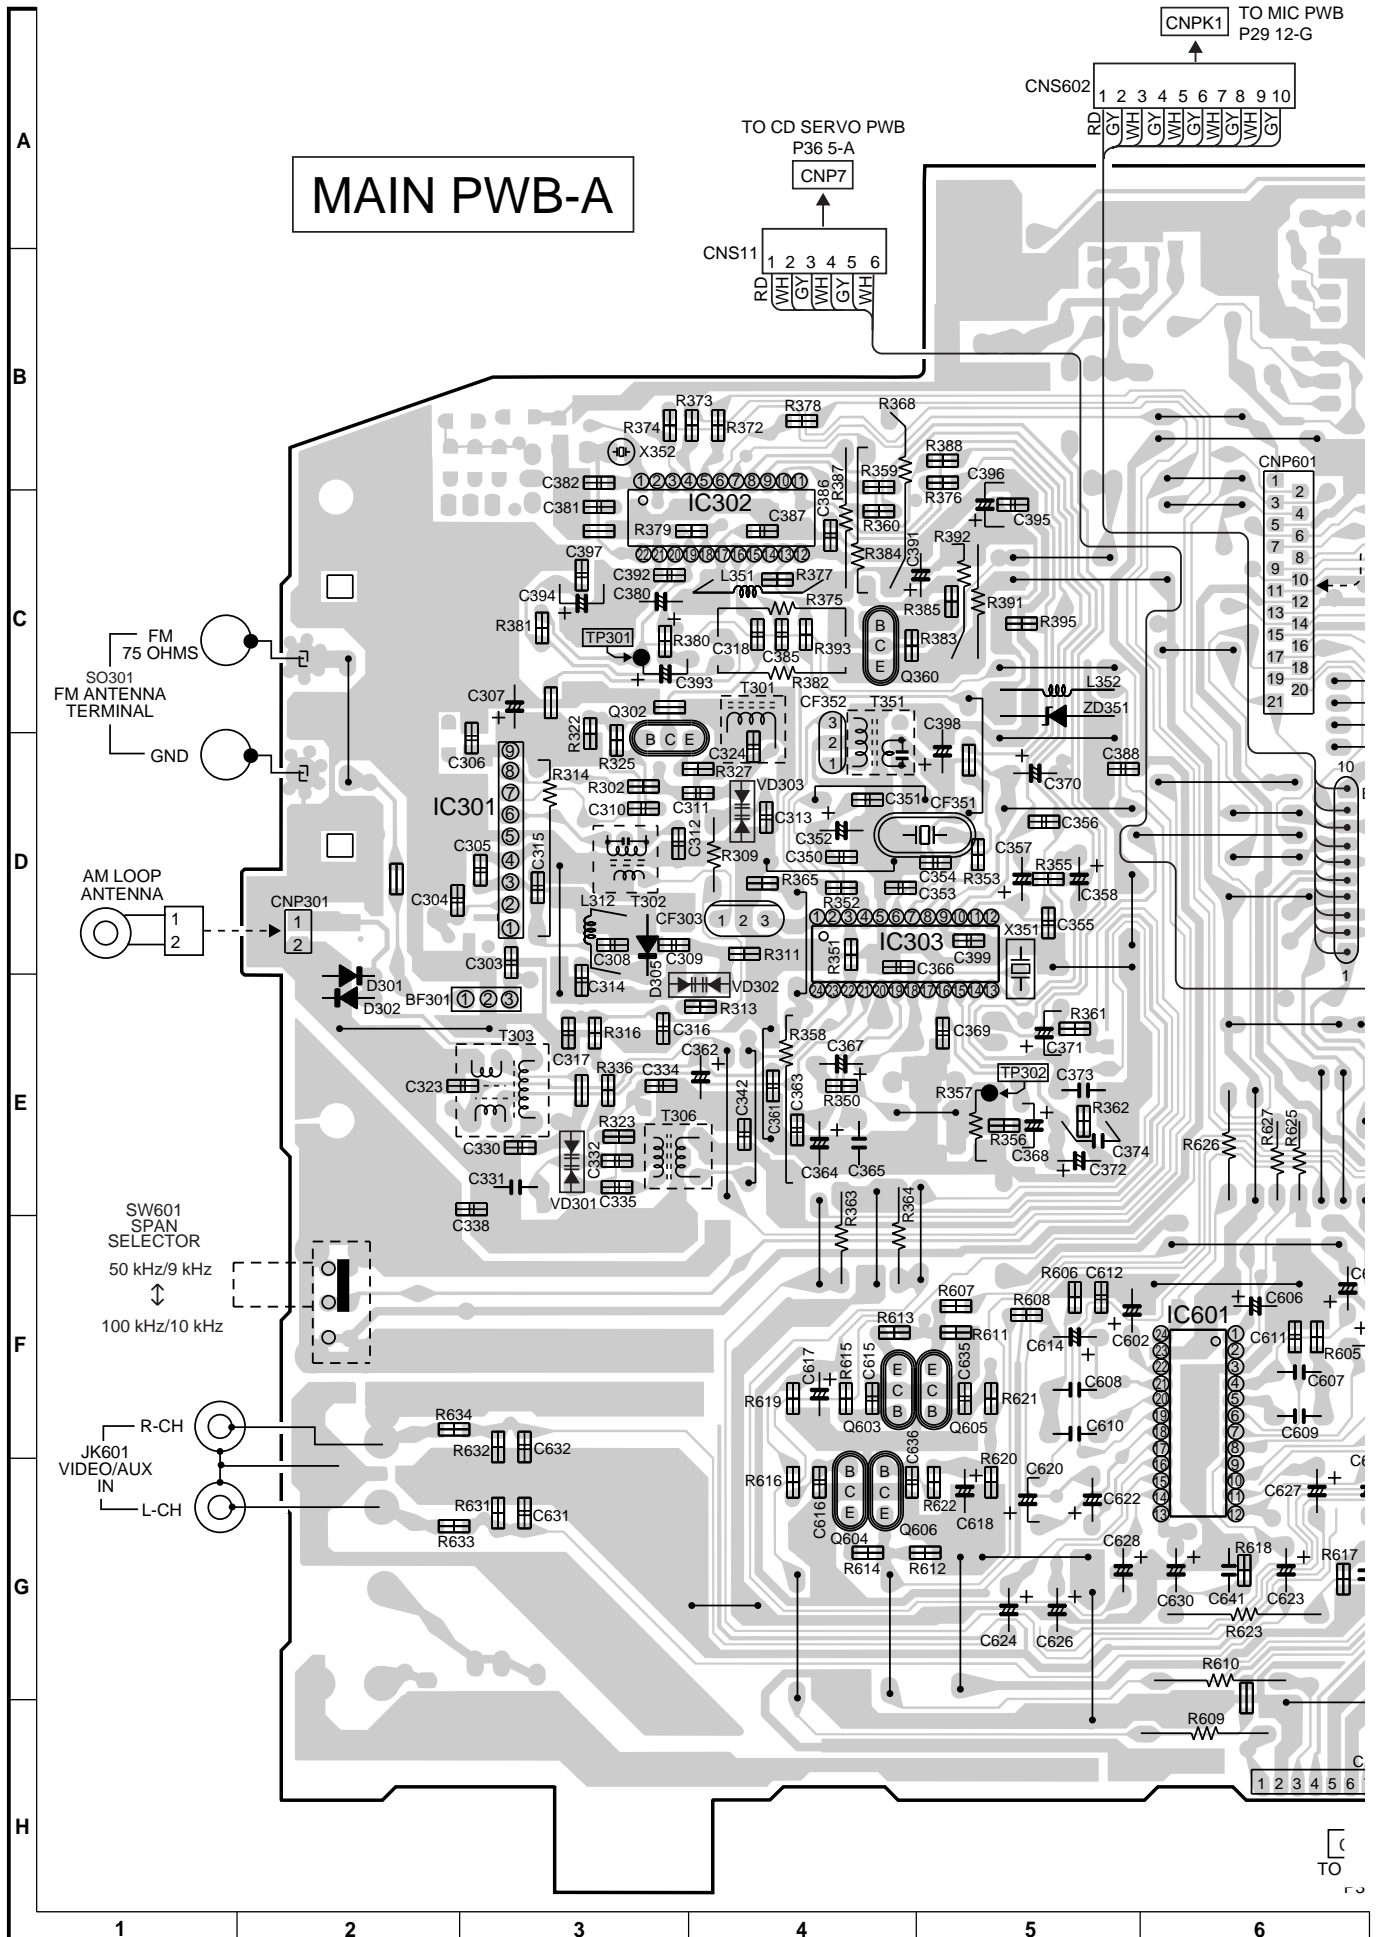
WIRING SIDE OF P.W.BOARD (2/9)
